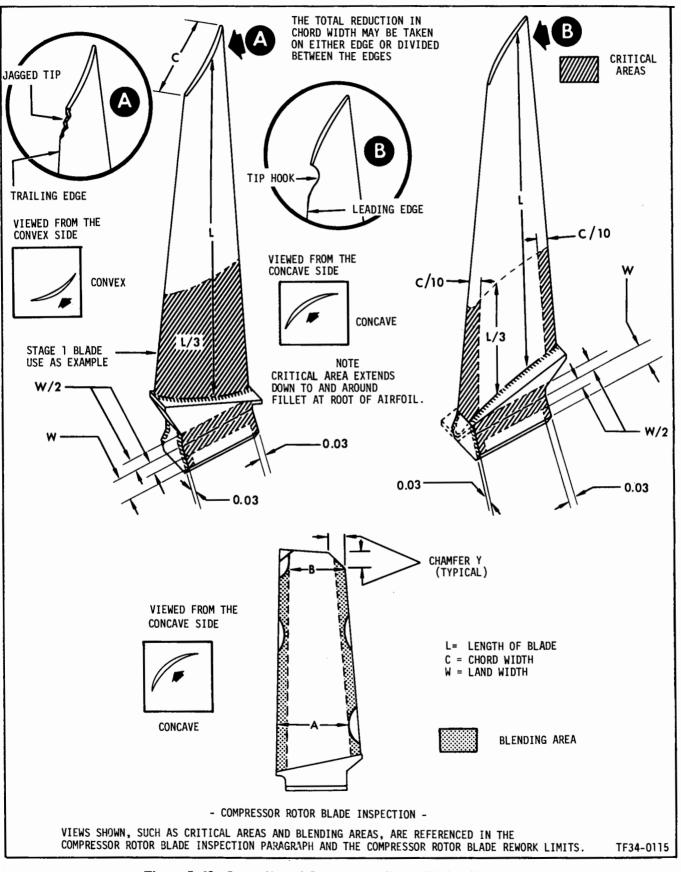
Inspection of Compressor Rotor Blades (Sheet 1 of 2)
